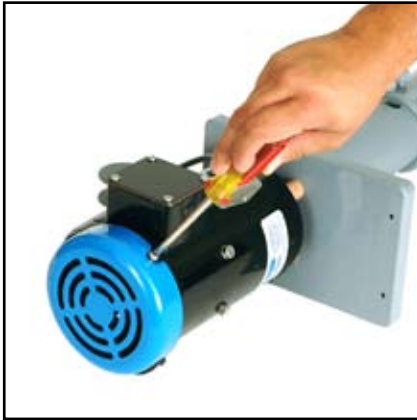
Use Phillips-head screwdriver to remove screws holding Fan Cover to Motor.
